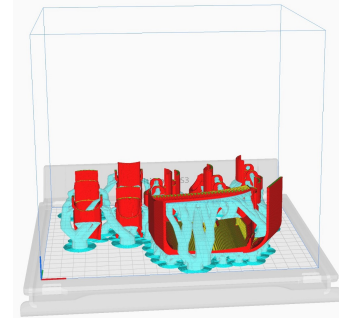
Layout of individual 3D-printed exoskeleton glove components prior to assembly.
